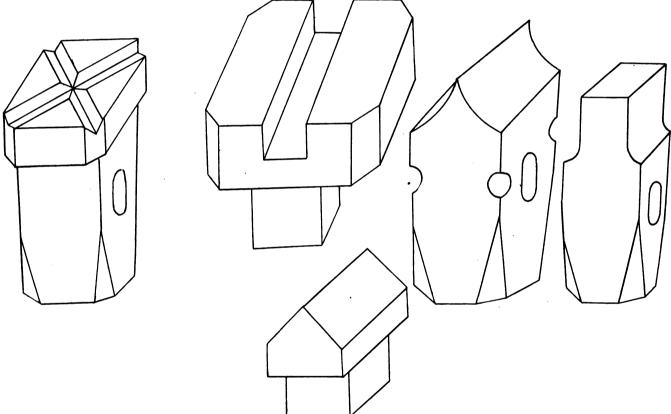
MAKING AND TEMPERING DRILL STEELS. SHOWING FORMS OF PROPER SHAPE.
